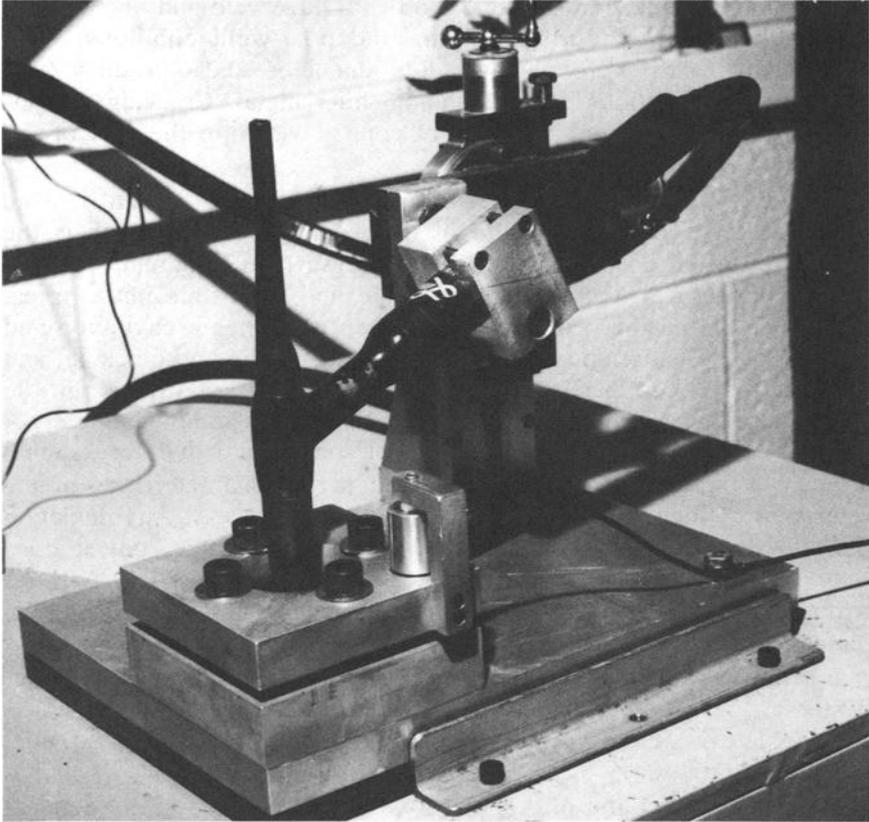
Clamping fixture used to hold beryllium coupon in determining crack susceptibility by the acoustic emission produced as a result of a thermal shock. The GTA welding torch and acoustic emission sensor are shown in place.
